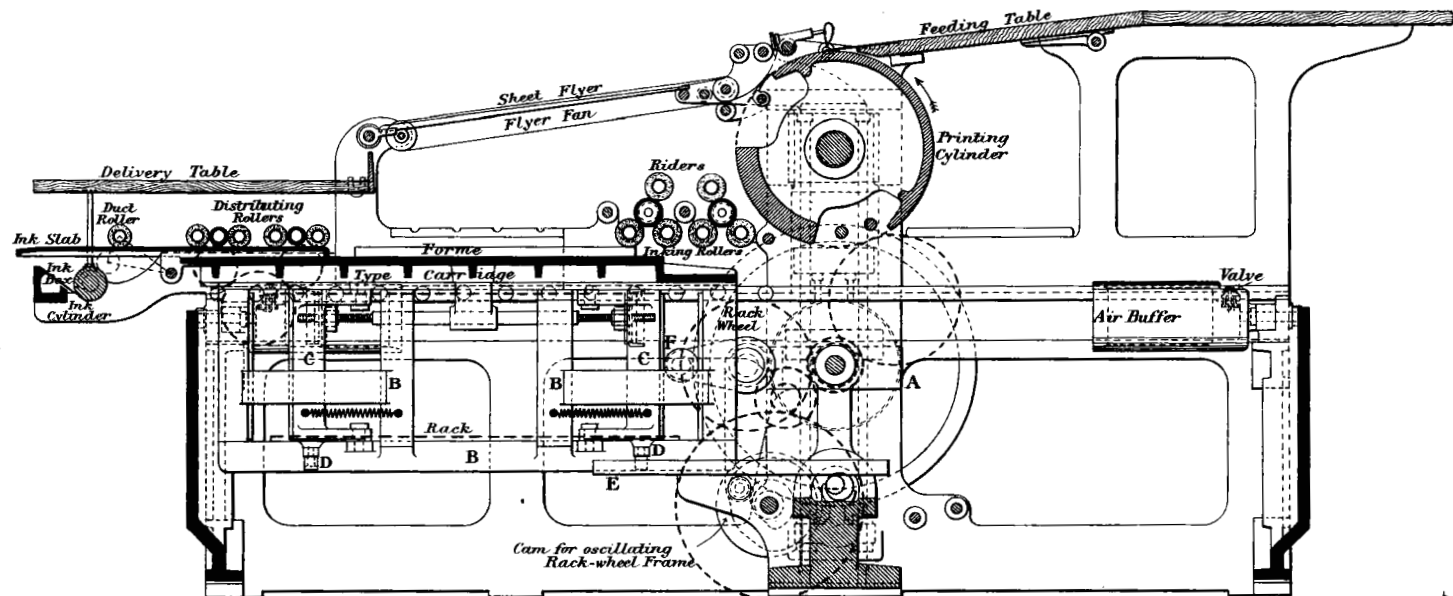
Two-Revolution Single-Cylinder Printing Machine.
